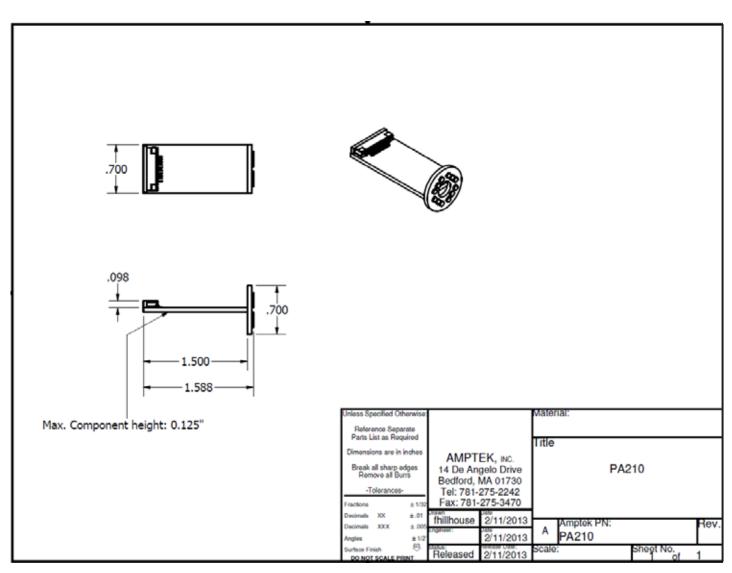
PA-210 Mechanical Dimensions, All Measurements in Inches.
